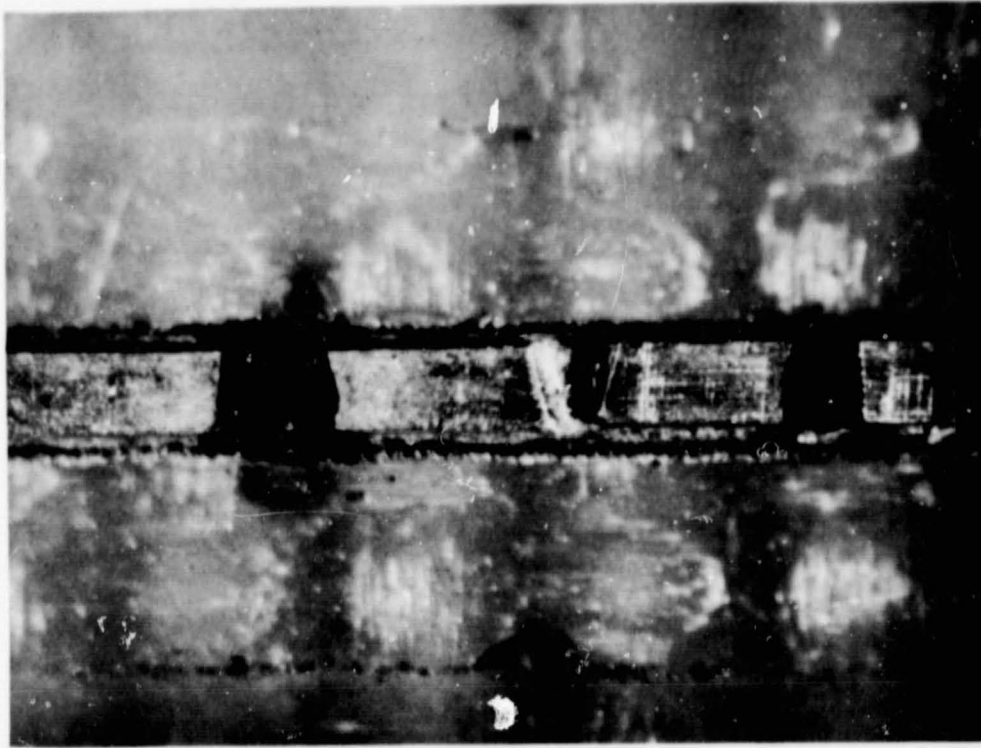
Welding Performed at Same Gap Width (Insufficient Weld on the Right)
